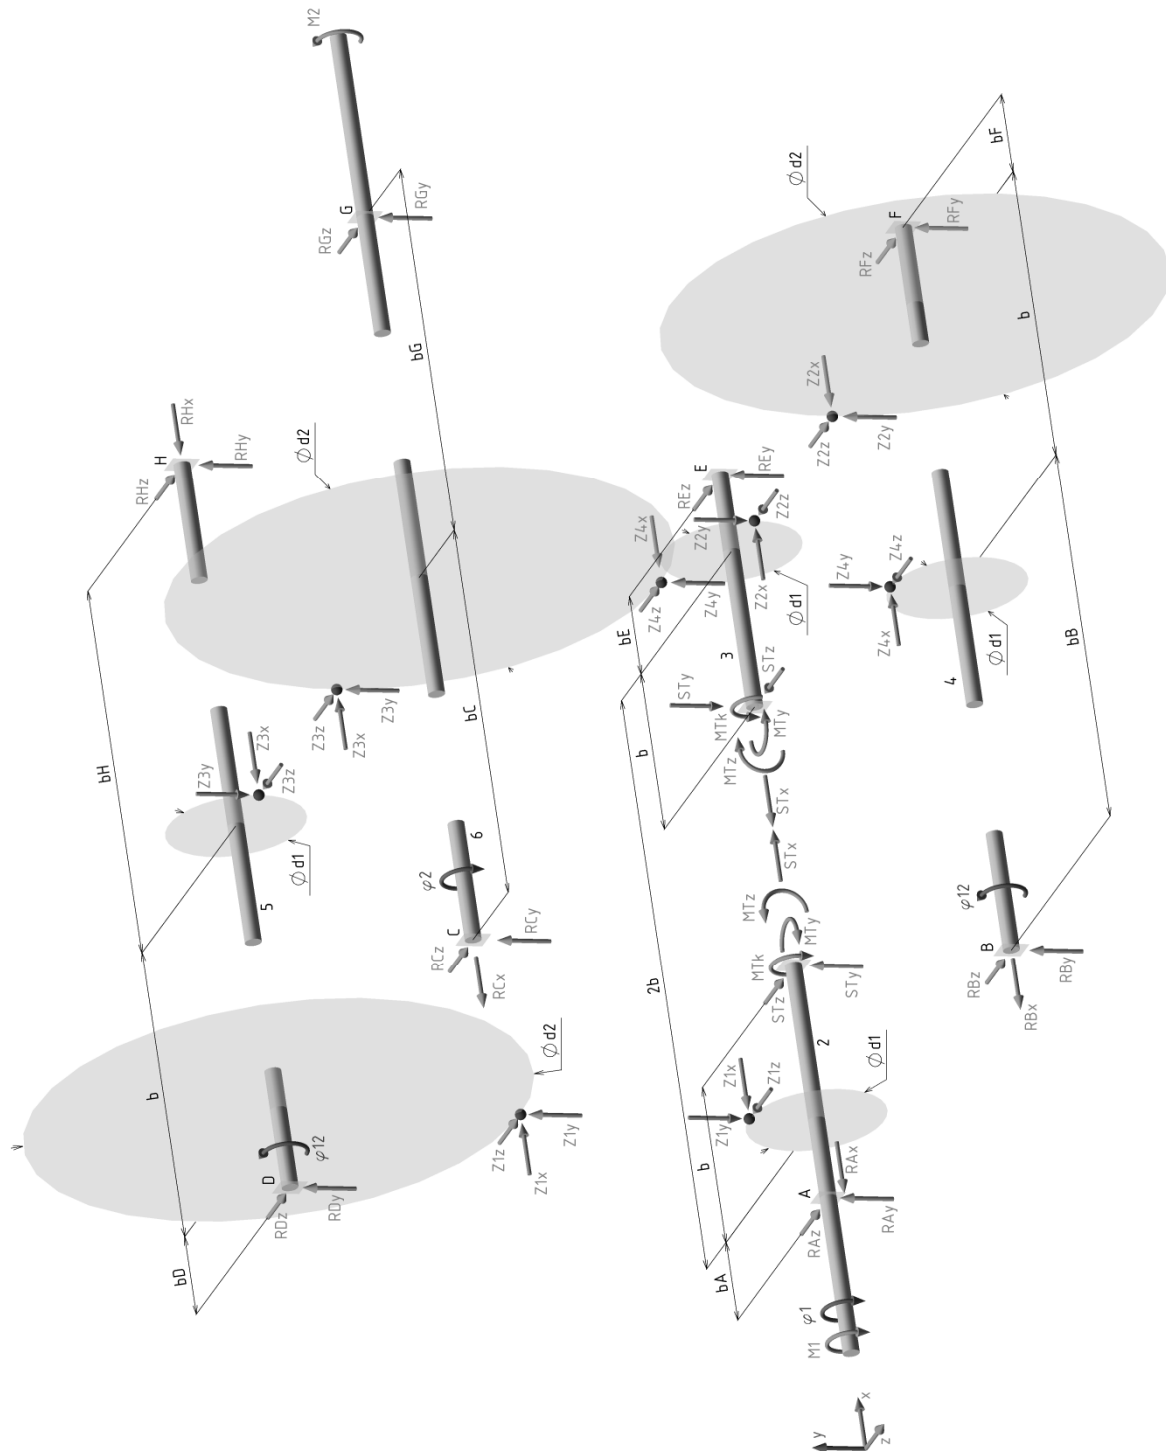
External forces and forces on bearings, gear meshes and within torsion-bar spring
